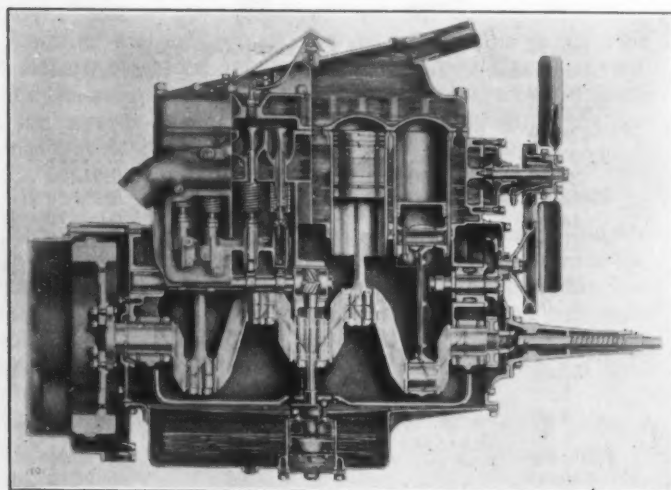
SECTIONAL VIEW SHOWING THE CONSTRUCTION OF THE ENGINE UPON WHICH THE TESTS WERE MADE
